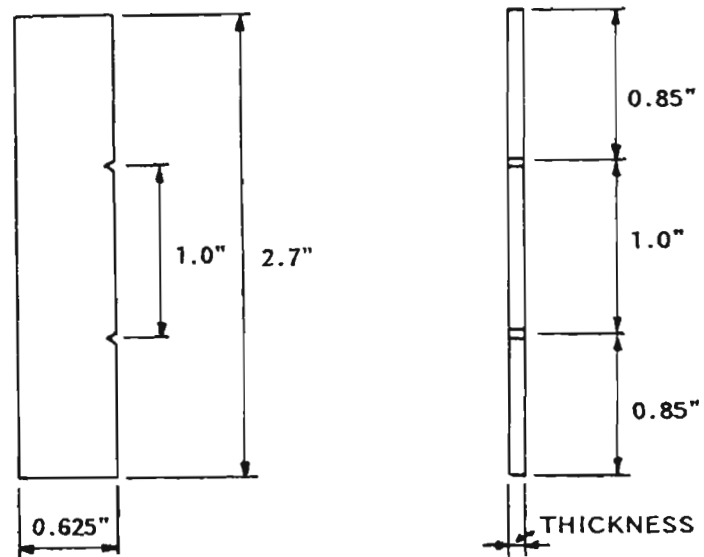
Nominal Dimensions of Compression Coupons Used for All Sheet Steels
